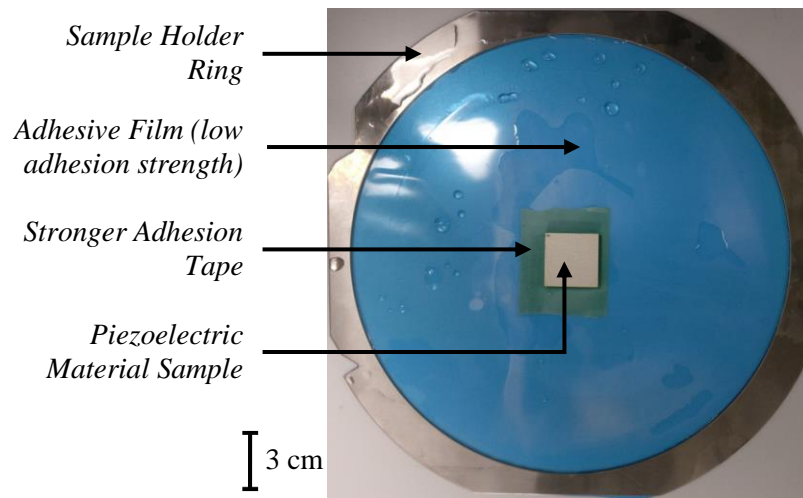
Mounting the Piezoelectric Wafer on the Dicing Machine Ring
